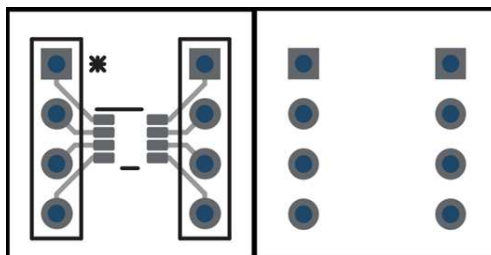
DCN and DDF packages top layer (left) and bottom layer (right) PCB layout
